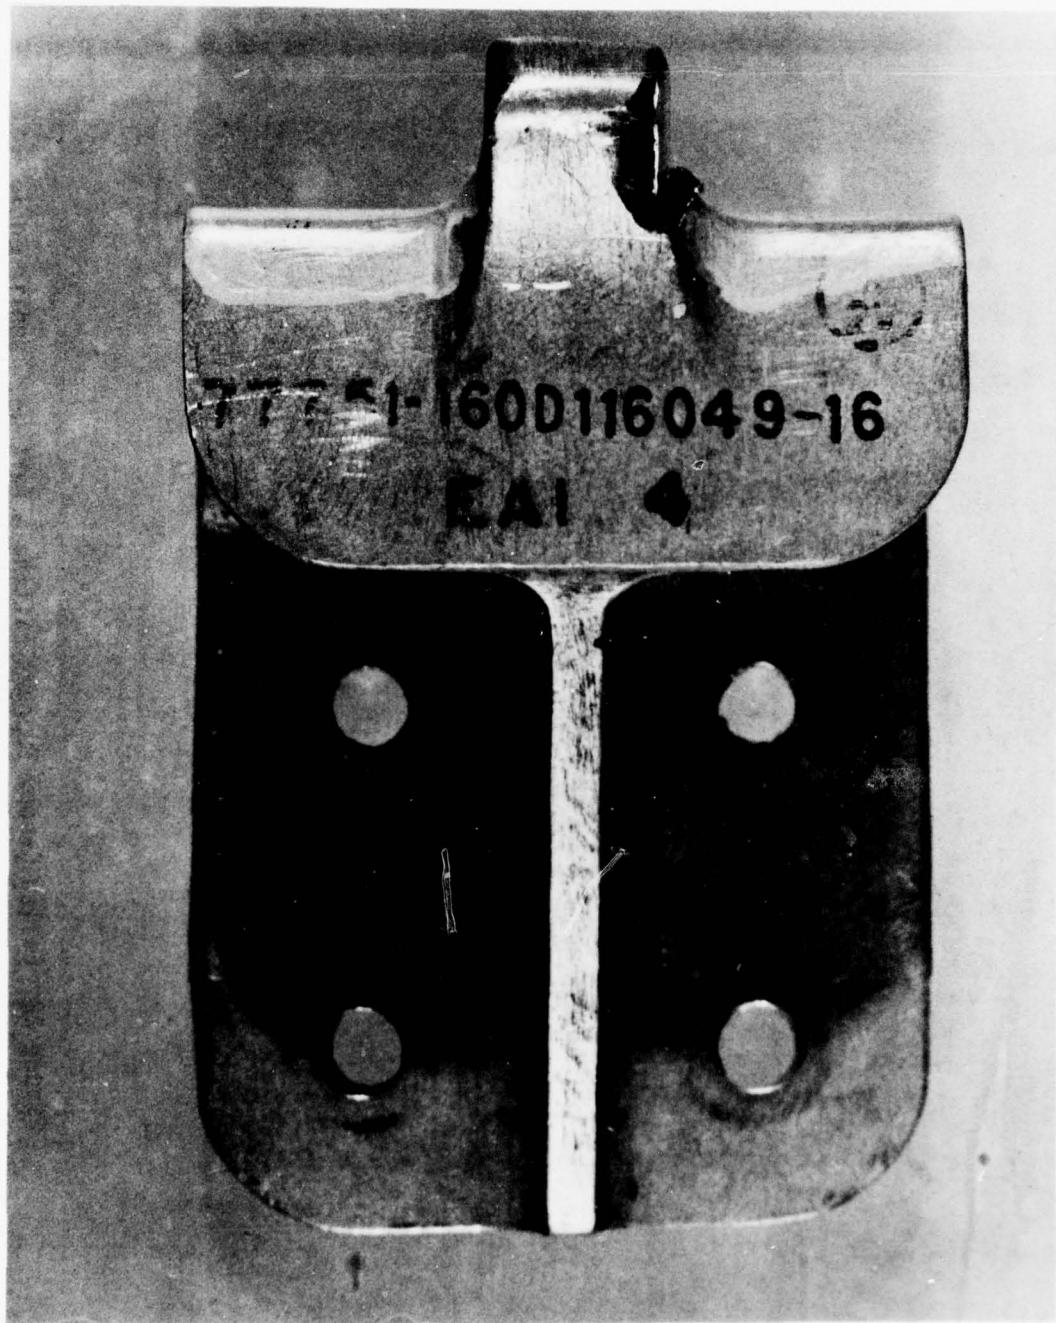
Failed Canopy Support Fitting - Part No. 160D116049-16
